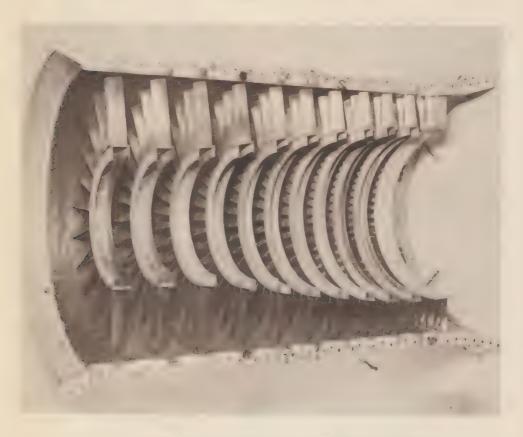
The compressor vanc assembly of the Westinghouse J34 turbojet.
